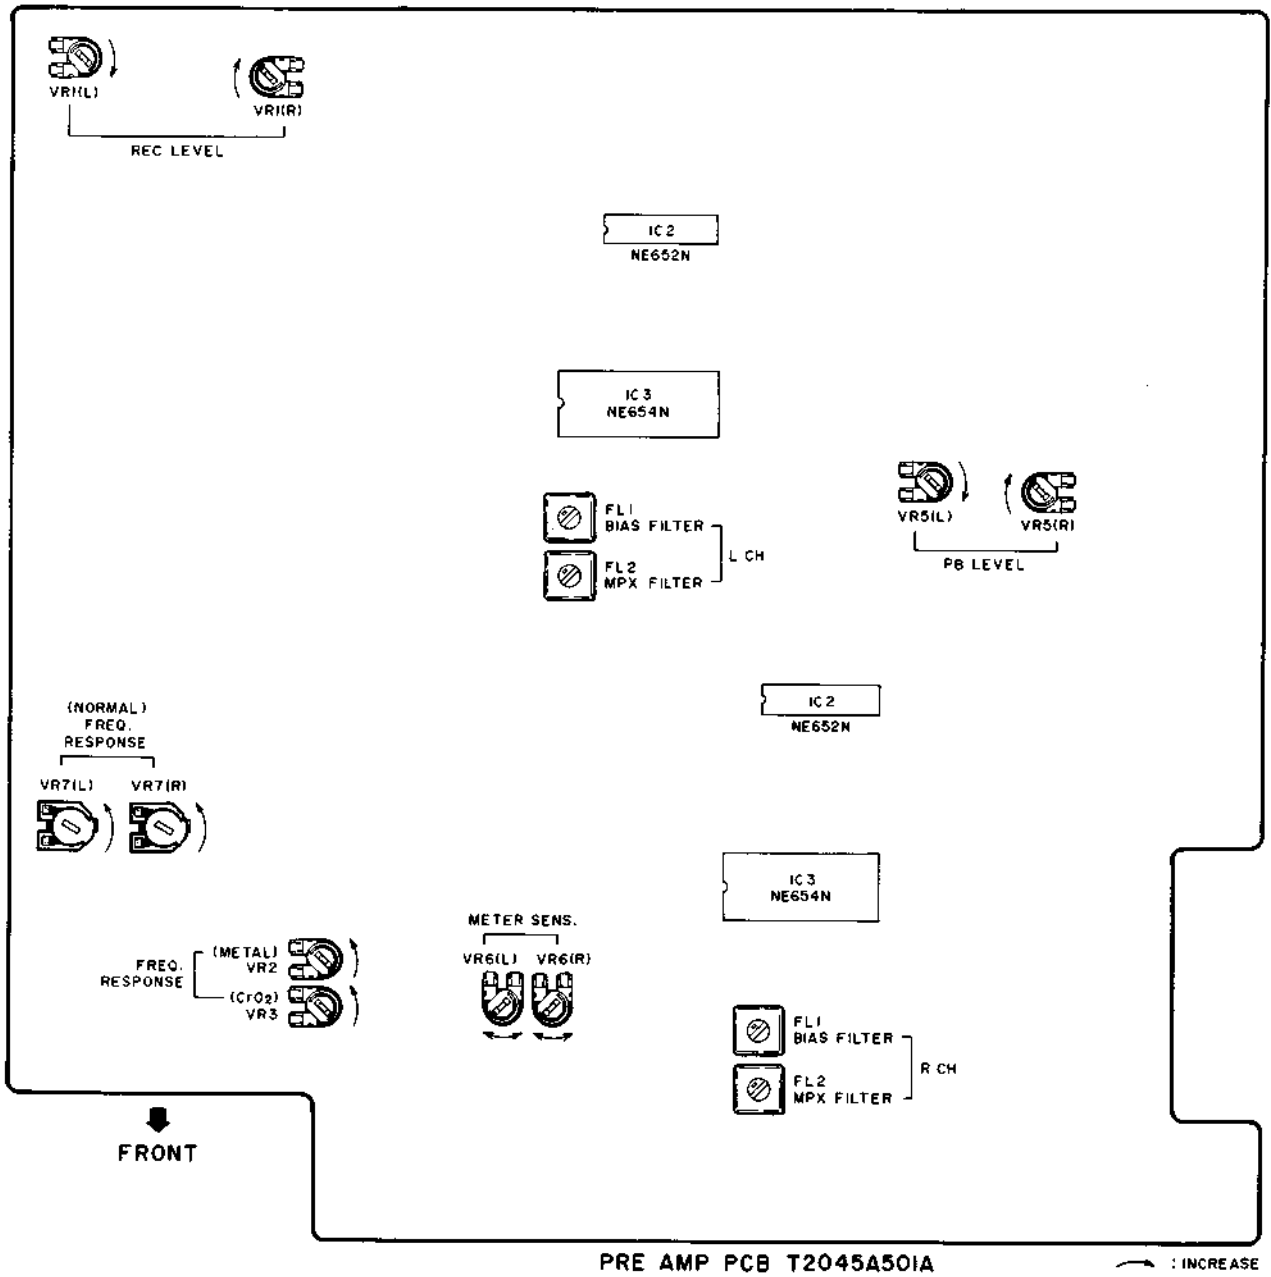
HX-R44 Pre-Amp PCB ADJ Point
